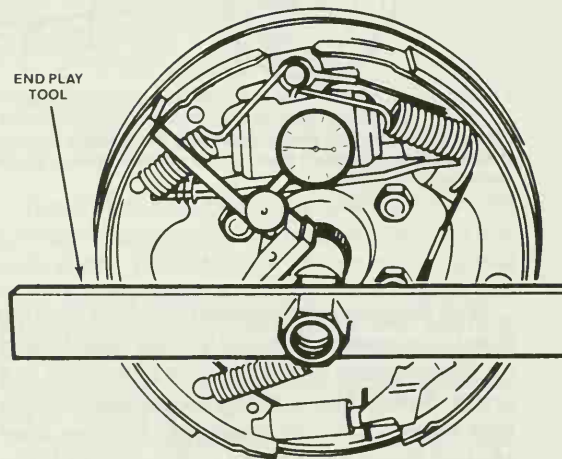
Measuring axle shaft end play. (American Motors Corporation)
